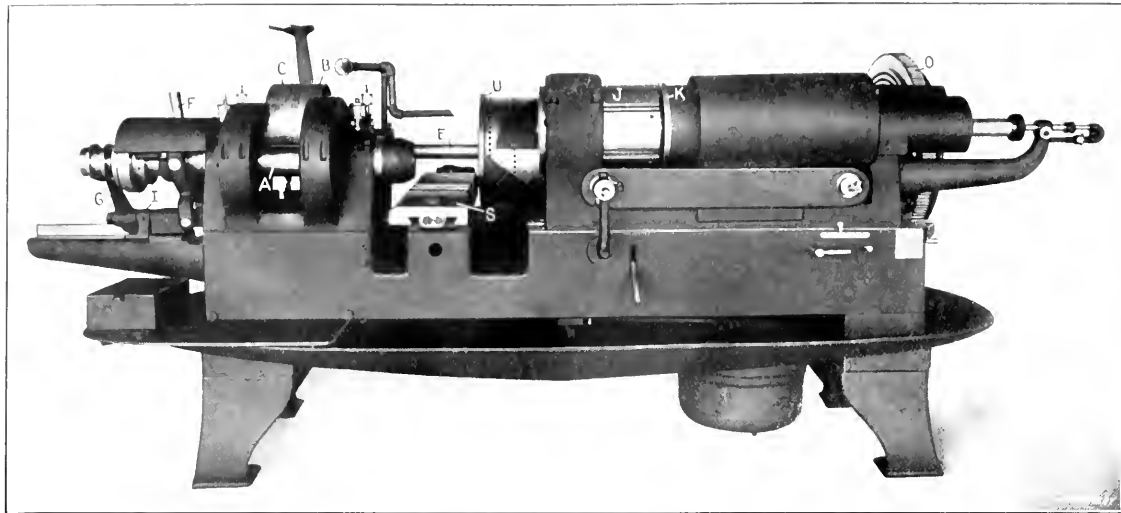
Front View of 3¼-inch Cleveland Full Automatic Screw Machine
